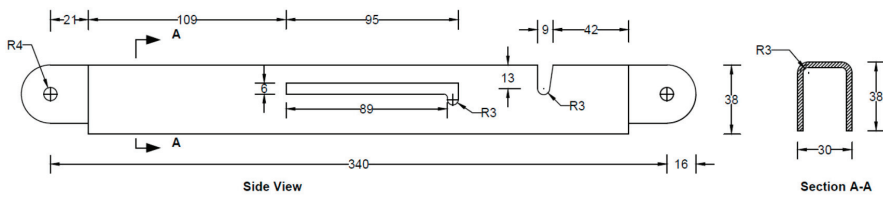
Details of primary folding link bars (all dimensions are in mm, steel plate gauge 11).
